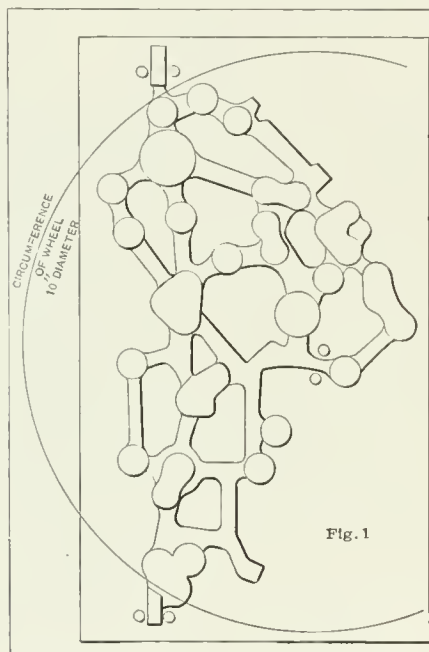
The Fixture used in Finishing Both the Right- and Left-hand Frames to the Desired Thickness
